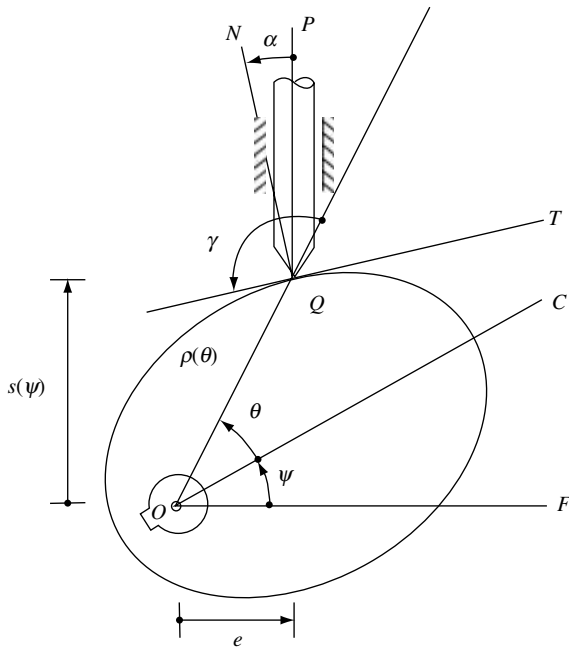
Geometry of a cam mechanism with a translating knife-edge follower.
